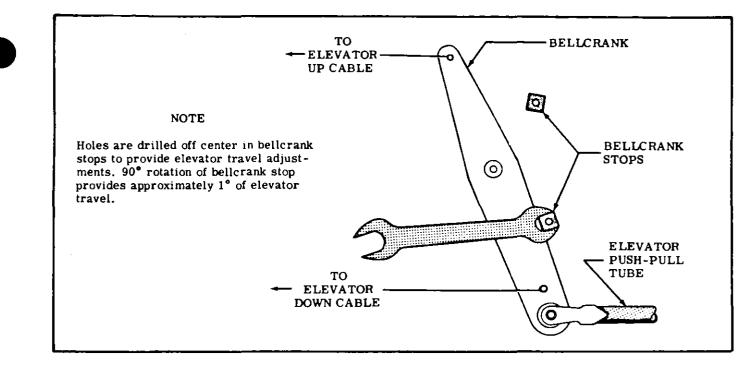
Elevator Bellcrank Travel Stop Adjustment
